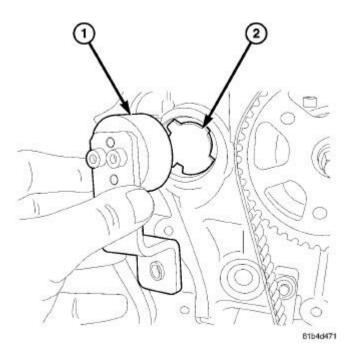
Camshaft Lock Tool Courtesy of CHRYSLER LLC
